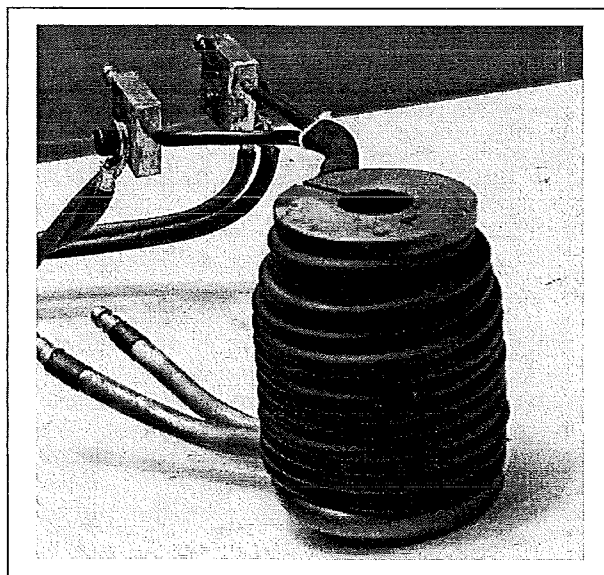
Assembly of the electromagnetic coil used in this project.
